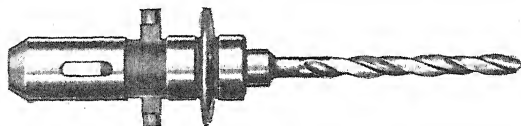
A Wizard Collet for Taper-Shank Tools with a Twist Drill in Place:
